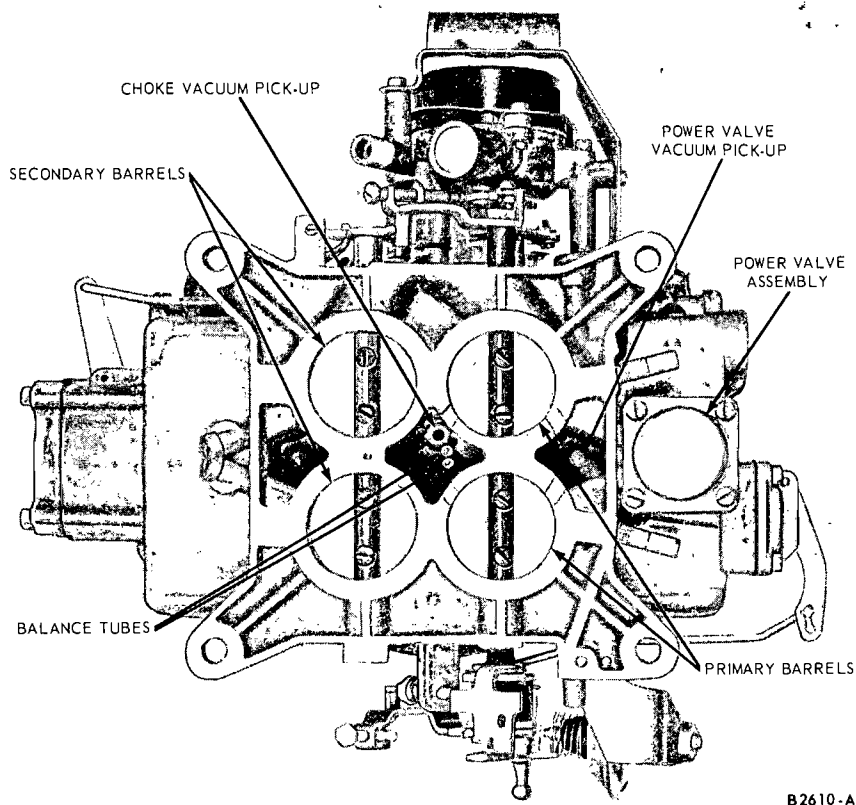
Autolite Model 4100 4-V Carburetor — Bottom View
